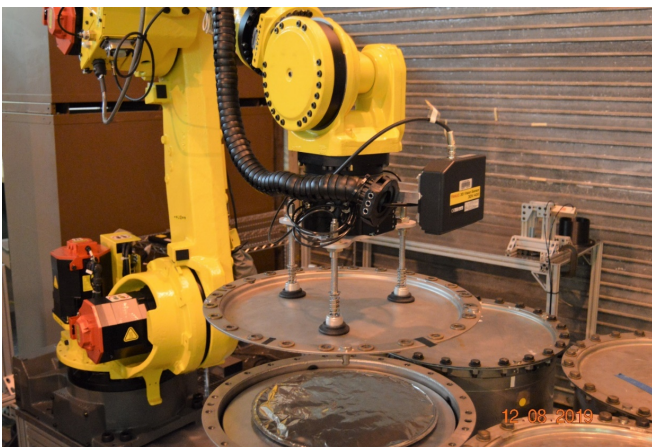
Vacuum Gripper EOAT removing 9975 lid.
